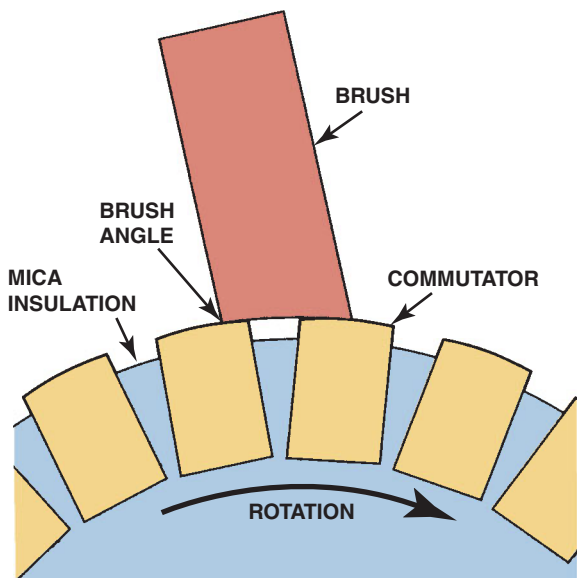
Replacement starter brushes should be installed so the beveled edge matches the rotation of the commutator.
